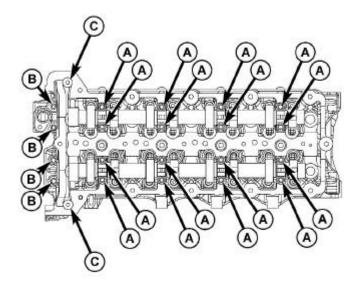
Cylinder Head Mark Courtesy of CHRYSLER LLC
